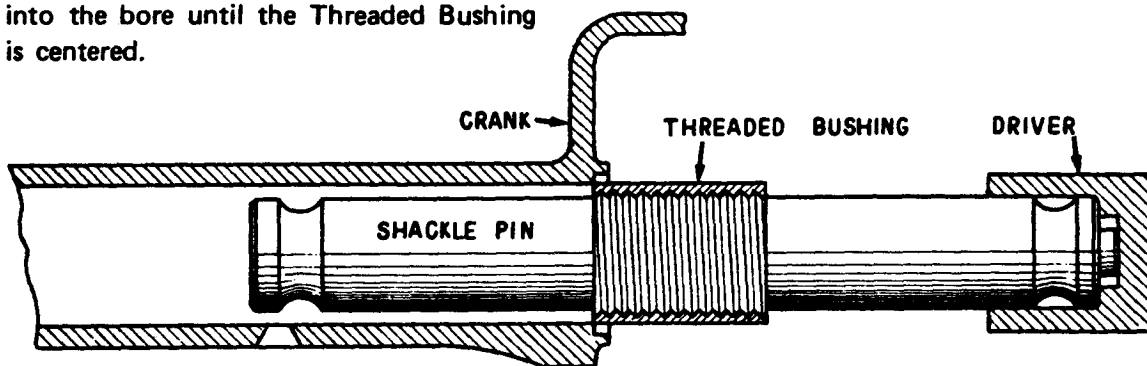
PRESSING THREADED BUSHING INTO CRANK OR PERCH
